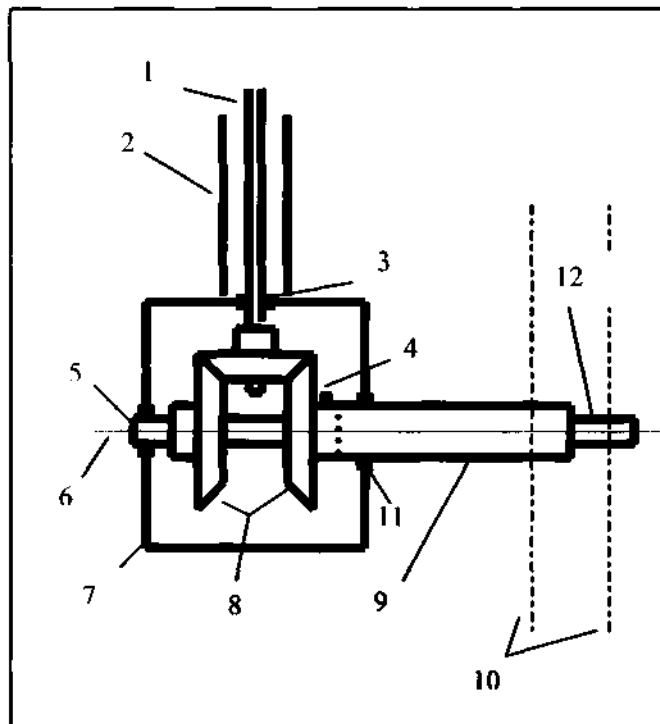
Schematic diagram of the bevel-gear assembly. 1- Drive from the motor, 2- Protecting hood and support for the drive, 3-Bush, 4-Screw, 5-Upper bound for inner solid shaft, 6- Axis of inner solid shaft, 7- Casing, 8- Bevel gears, 9- Hollow outer shaft, 10- Model wing attachment location, 11- Bush, 12-Inner Shaft
